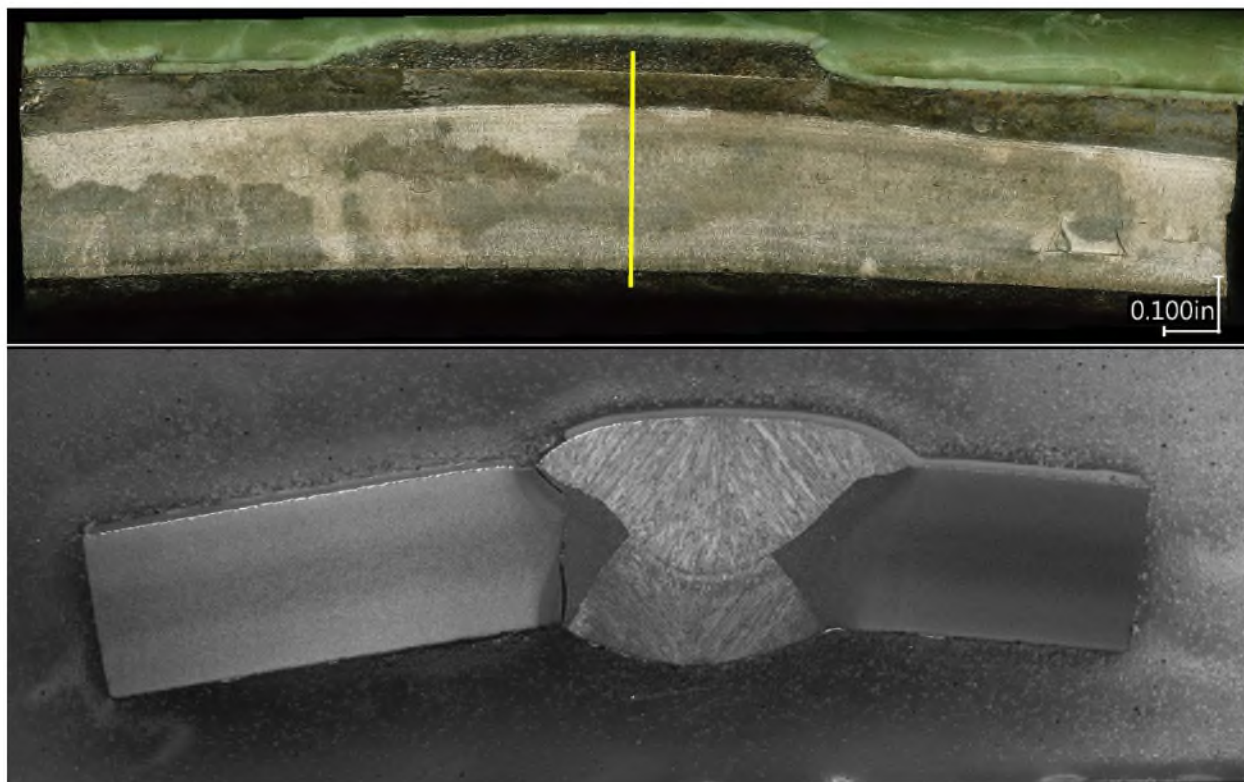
Model 3 - cross-section of seam weld through fatigue at deepest penetration
